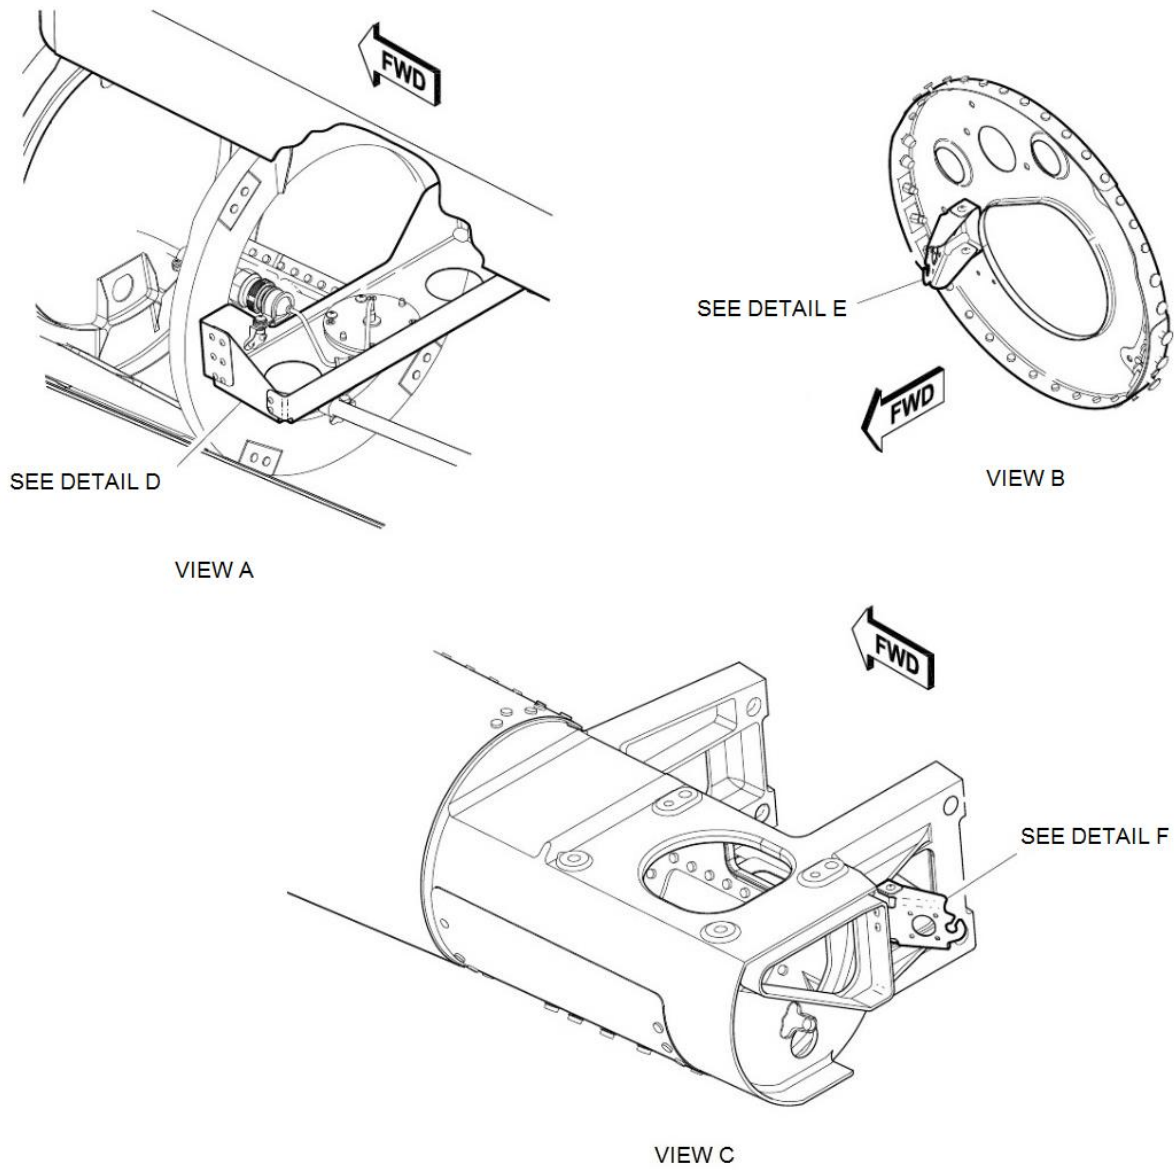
Tailboom Assembly (Sheet 2 of 4)
